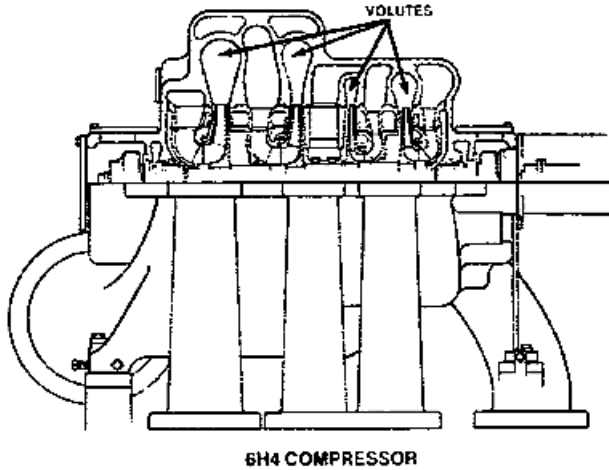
Cross-sectional view of an over-the-impeller volute-type diffuser. (Dresser-Rand Company, Olean, N.Y.)
